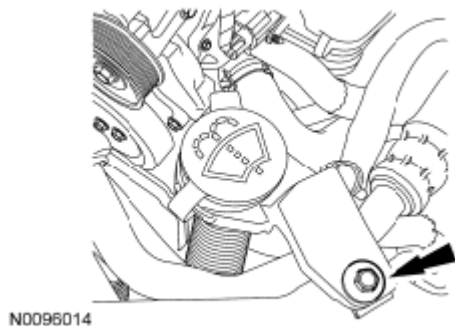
Locating A/C Tube/Windshield Washer Reservoir Bracket Bolt
